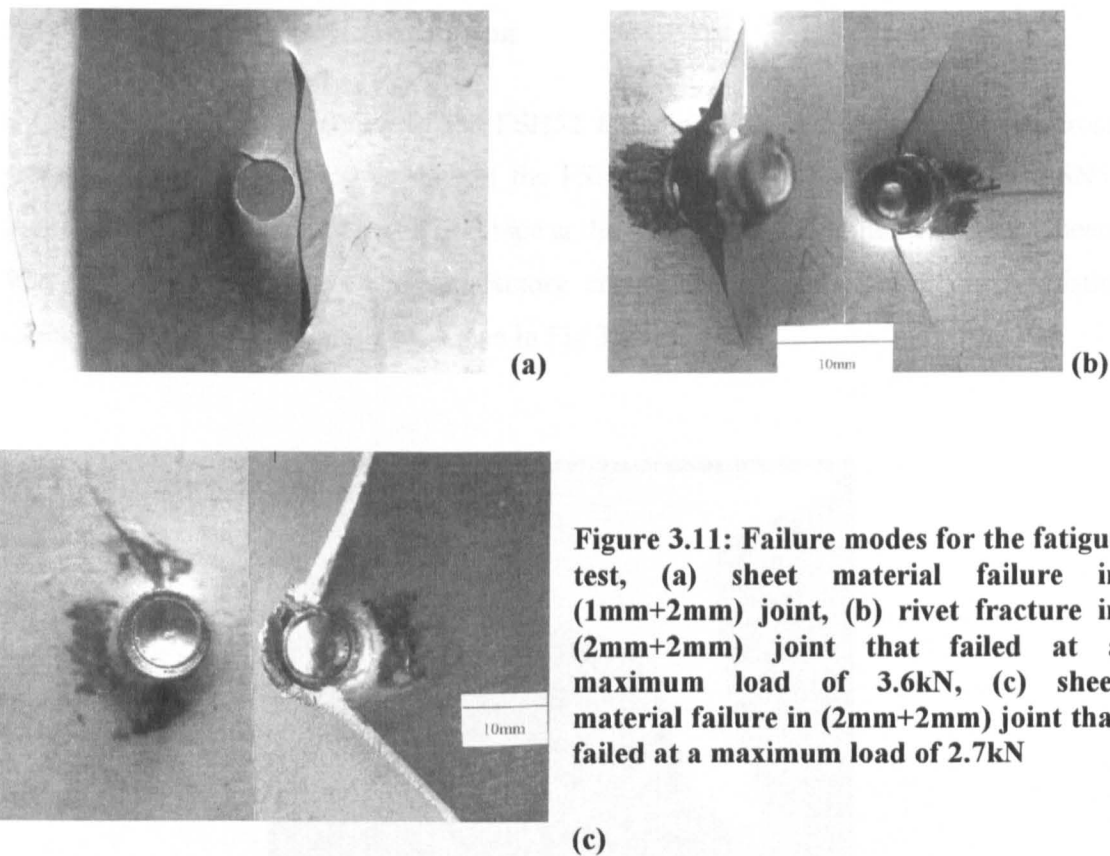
Failure modes for the fatigue test, (a) sheet material failure in (1mm+2mm) joint, (b) rivet fracture in (2mm+2mm) joint that failed at a maximum load of 3.6kN, (c) sheet material failure in (2mm+2mm) joint that failed at a maximum load of 2.7kN
